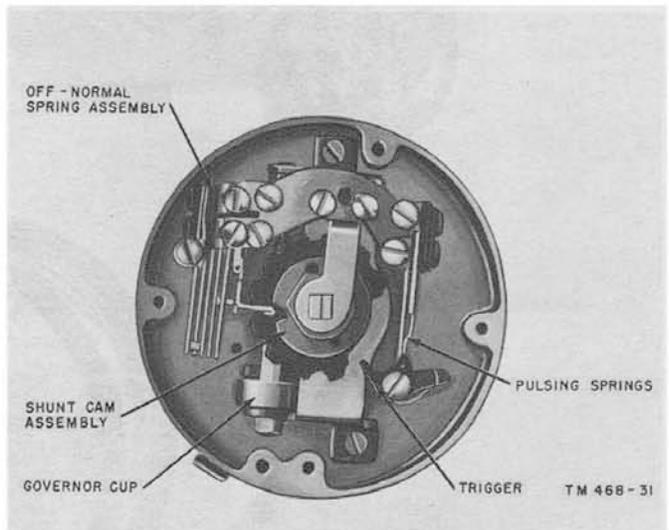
Dial TA-45B/GT, rear view, showing location of parts.
